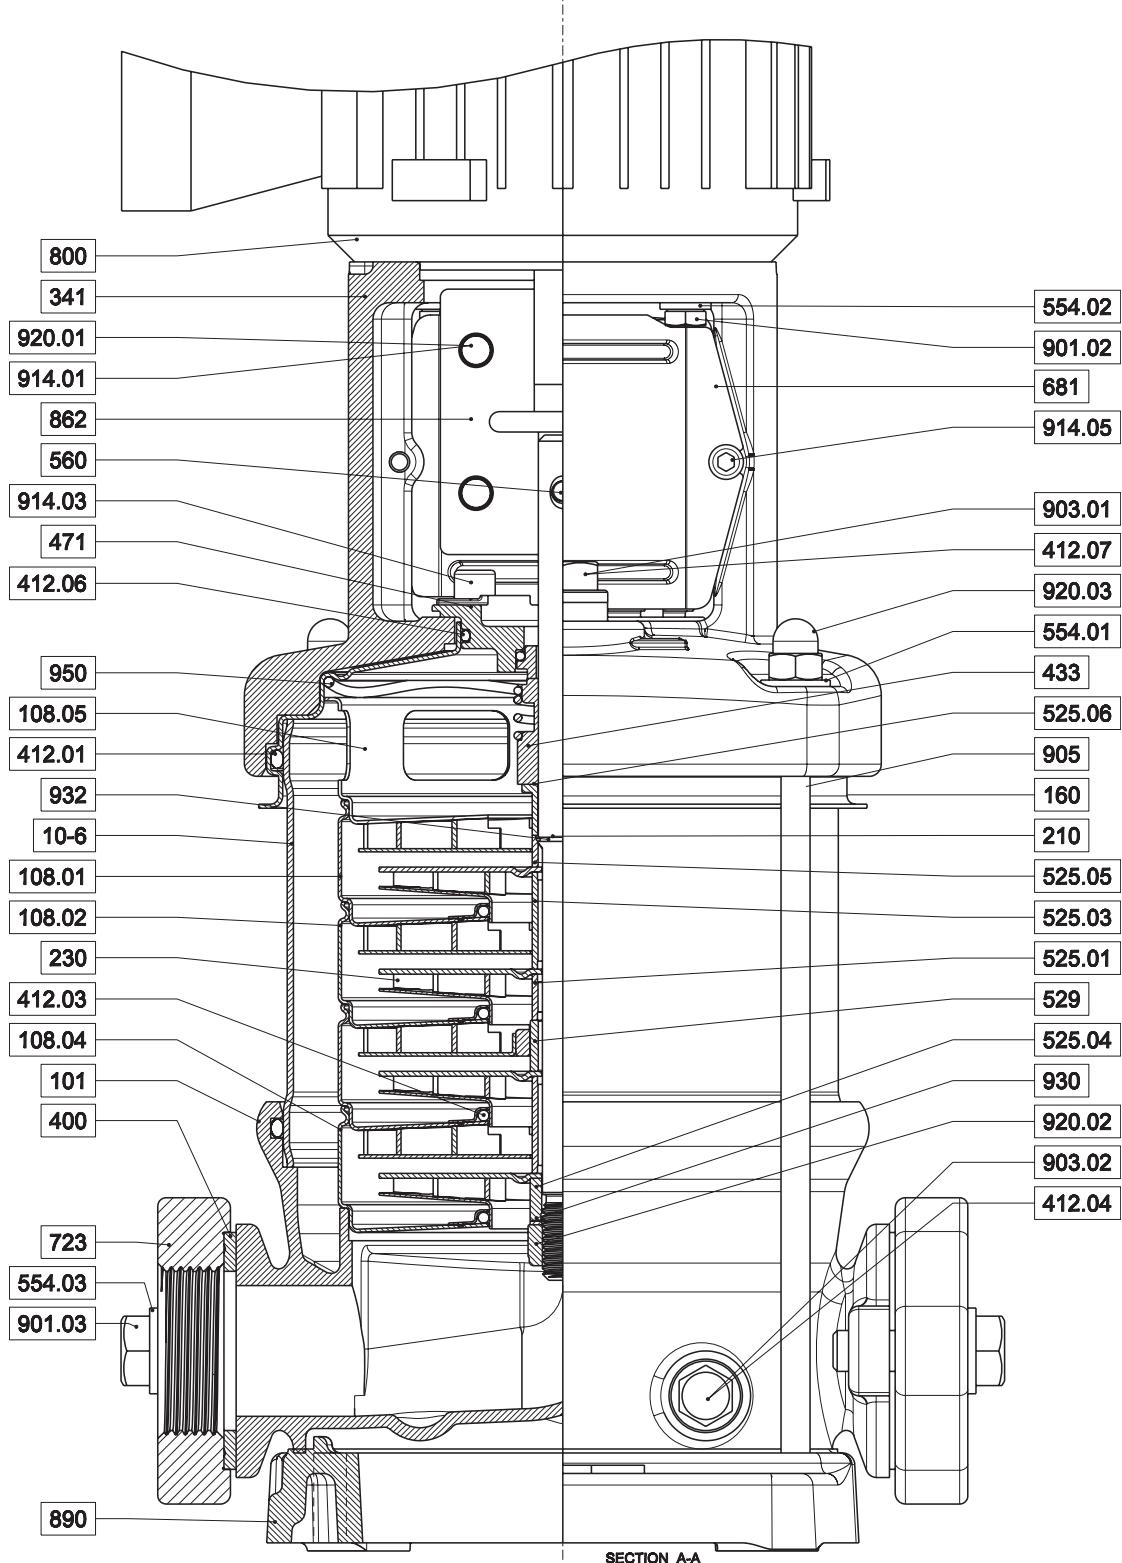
Sectional drawing DPV(S) 2/4/6 B
